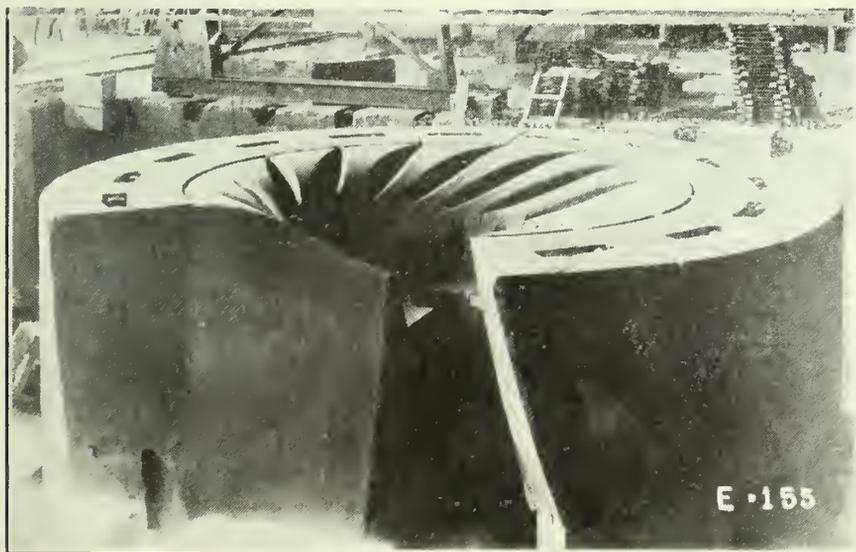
View in Foundry showing cores for runner of 41,000 H.P. turbine, being assembled in moulding pit.
